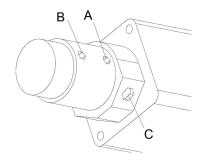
Schematic diagram of motor on the rear cover of welding torch
